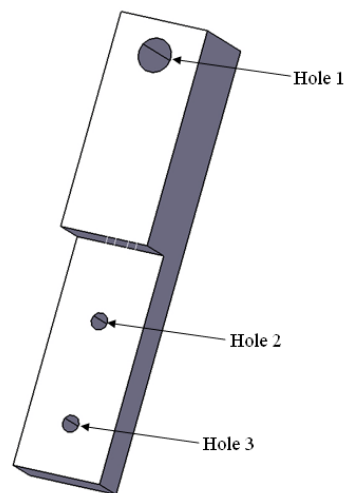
Isometric view of the single shear (Procedure ‘C’) test fixture
